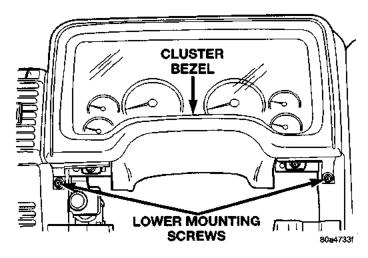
Cluster Bezel Lower Screws Remove/Install
